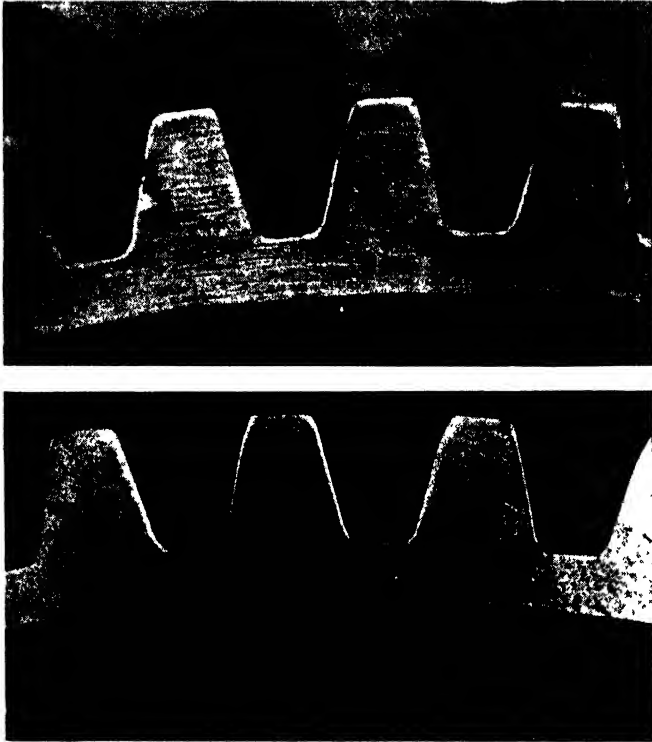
SHOWING (ABOVE) PORTION OF GEAR WHEEL AND (BELOW) CRACKS REVEALED BY MAGNETIC INK (MAGNAFLUX METHOD)
